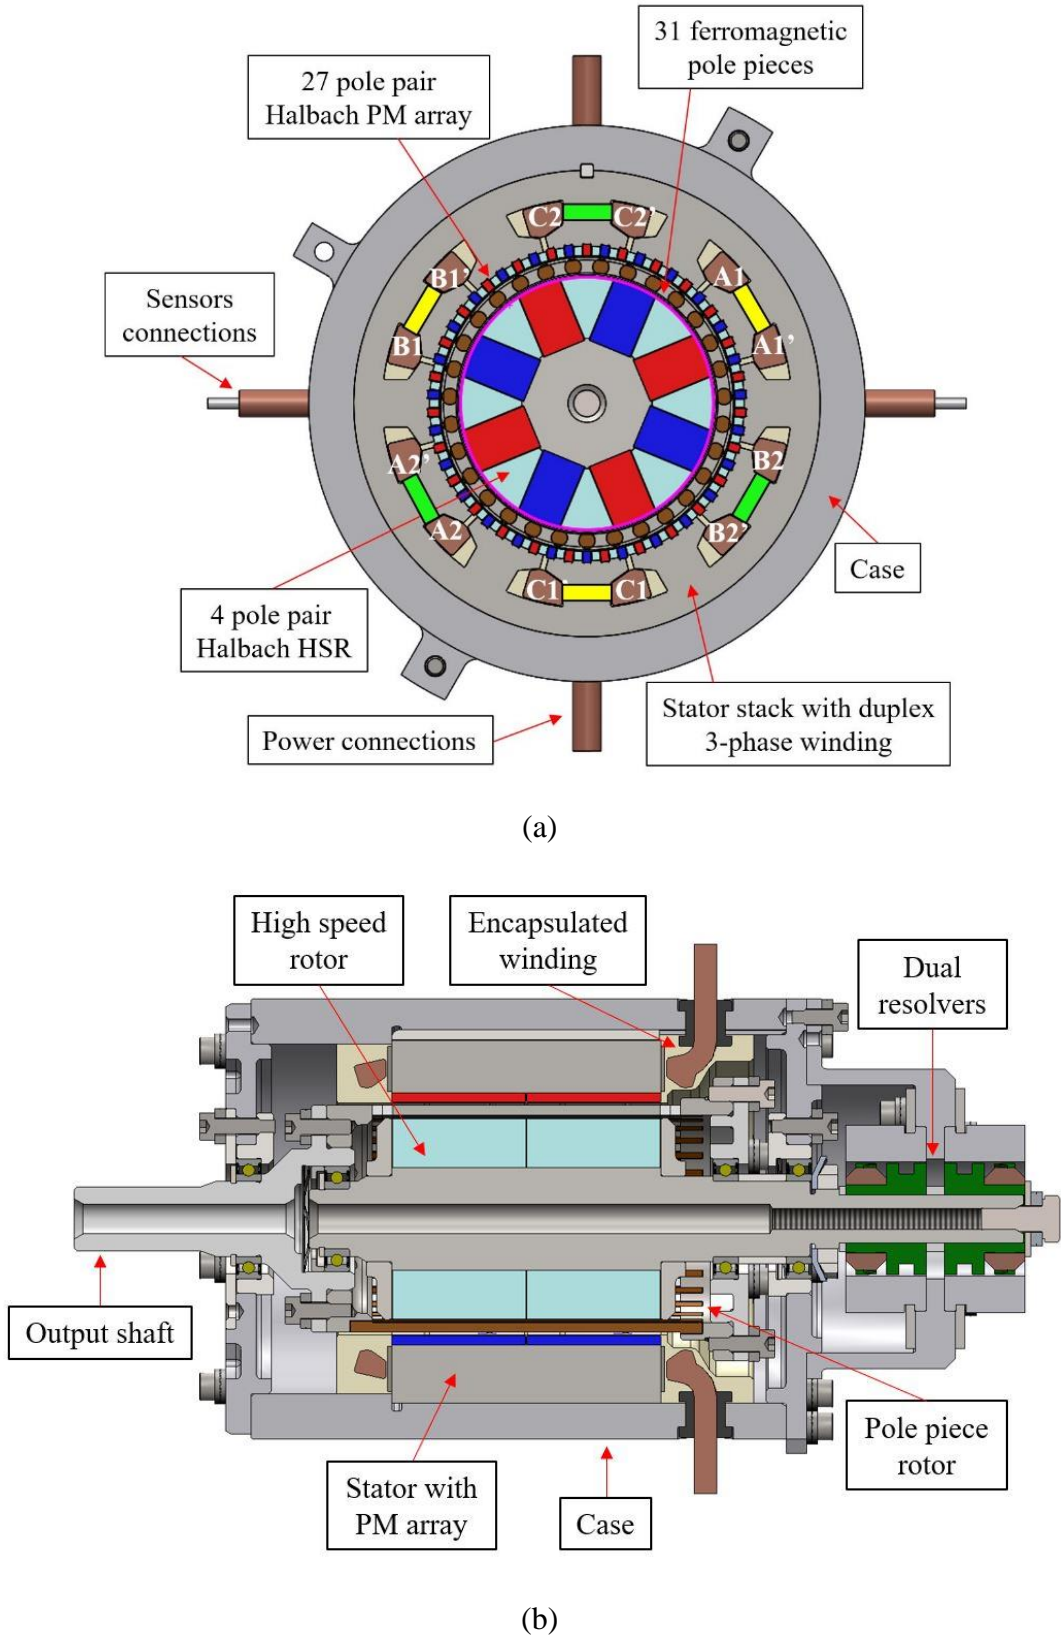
FT PDD motor prototype (a) cross-section (b) side-view
